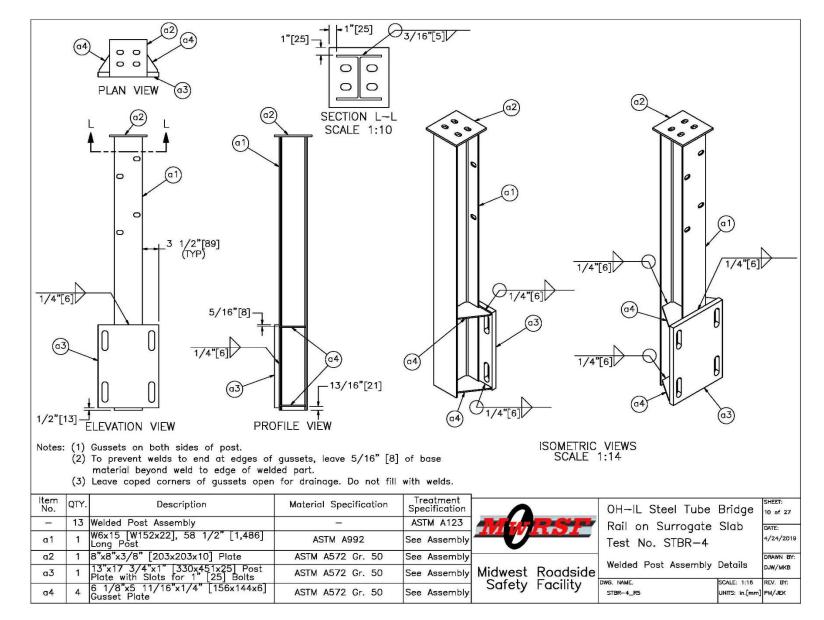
Welded Post Assembly Details, Test No. STBR-4
